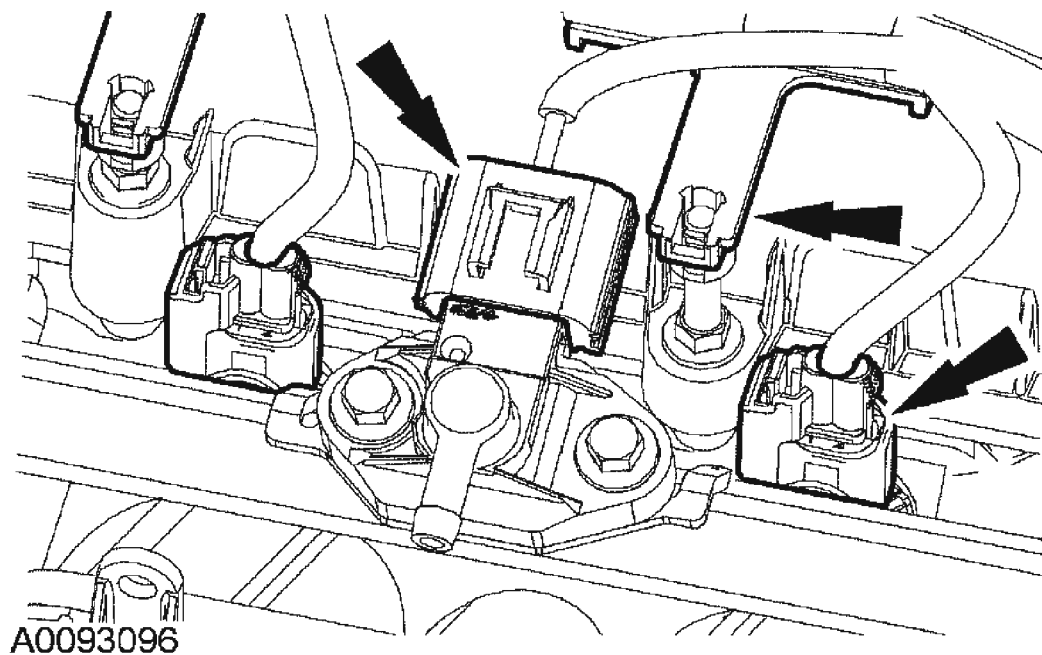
Disconnecting Fuel Charging Wiring Harness
